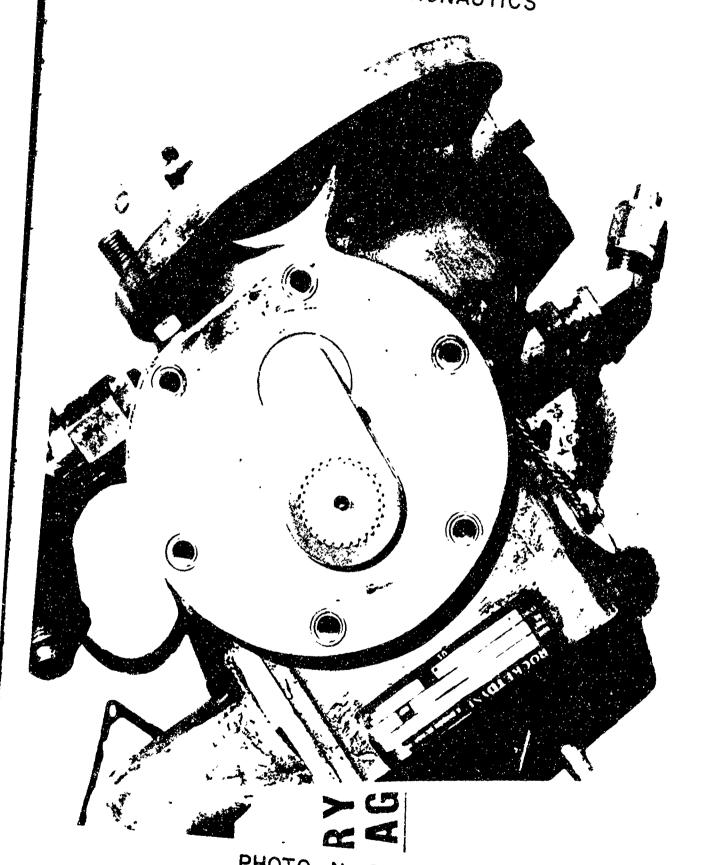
FUEL BLADE VALVE SHOWING DOWNSTREAM SEAL INTACT
